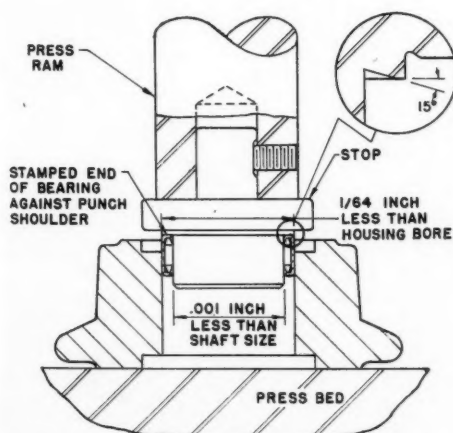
Simple tools for installing Torrington needle bearings can be turned out easily in any toolroom. The use of proper tools speeds up assembly and prevents damage to the bearings
